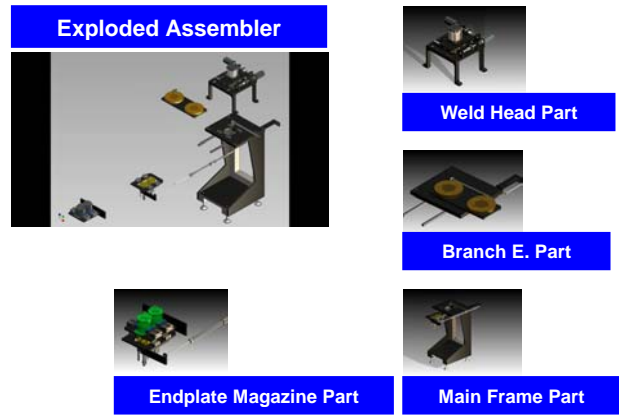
Auxiliary exploded and re-assembled functions of a top assembler.
